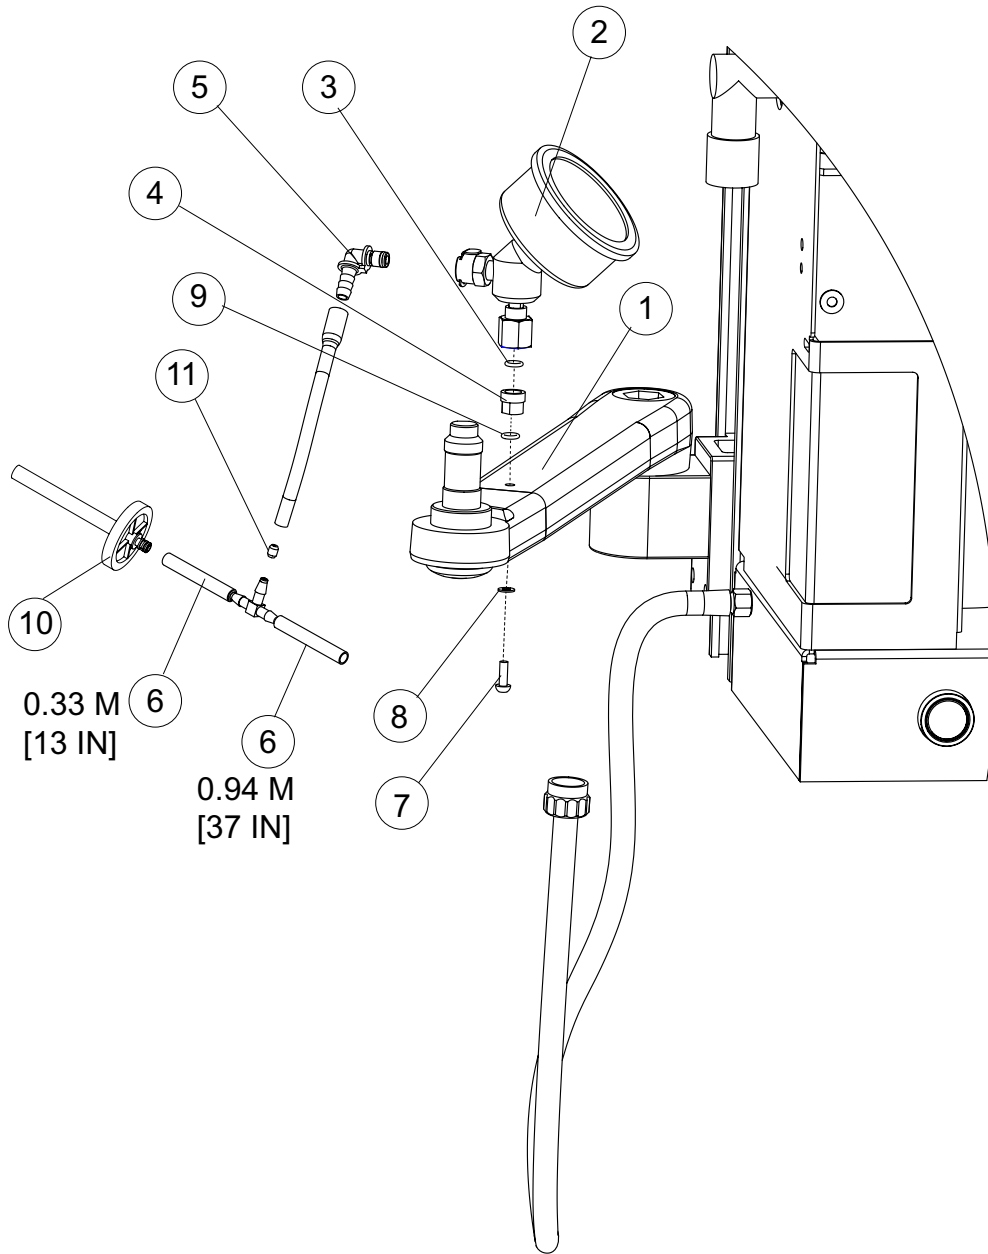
Breathing System Mount Assembly, Patient Airway Pressure Gauge Assembly
